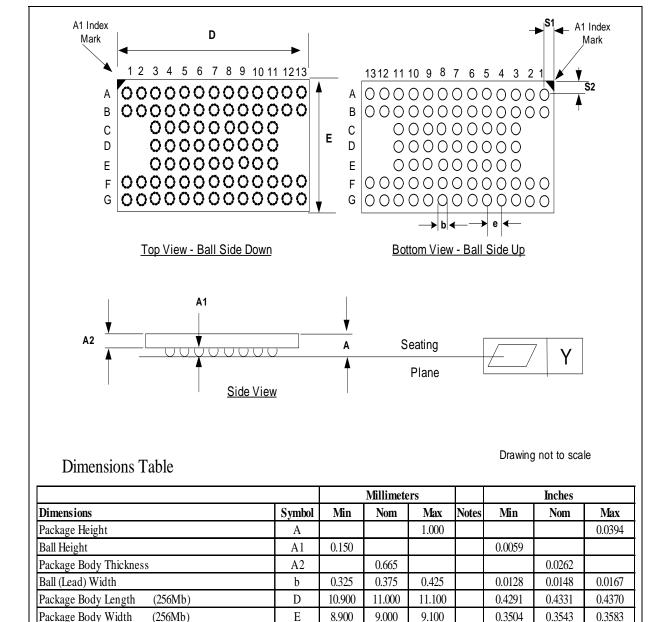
256-Mbit, 79-Ball VF BGA Package Drawing and Dimensions
